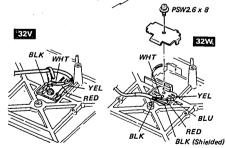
Head Arm Ass'y Replacement Head Carriage Ass'y Replacement
